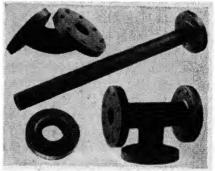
Typical forms of flanged hardrubber pipe and fittings. Flanges screw on the straight section of pipe, while the 90-degree ell and tee have integral flanges.
